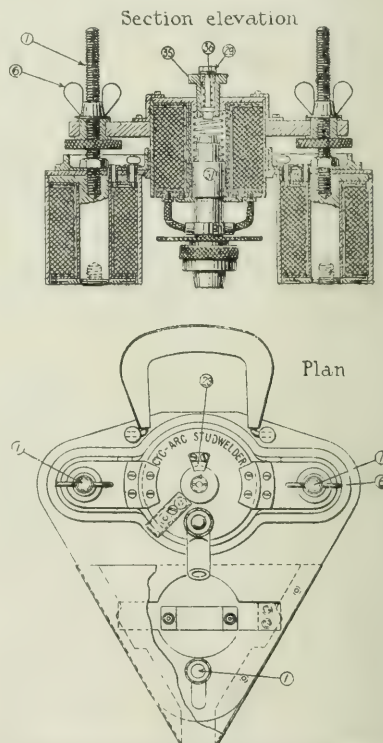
SECTIONAL ELEVATION AND PLAN OF "CYC-ARC" WELDING TOOL.
